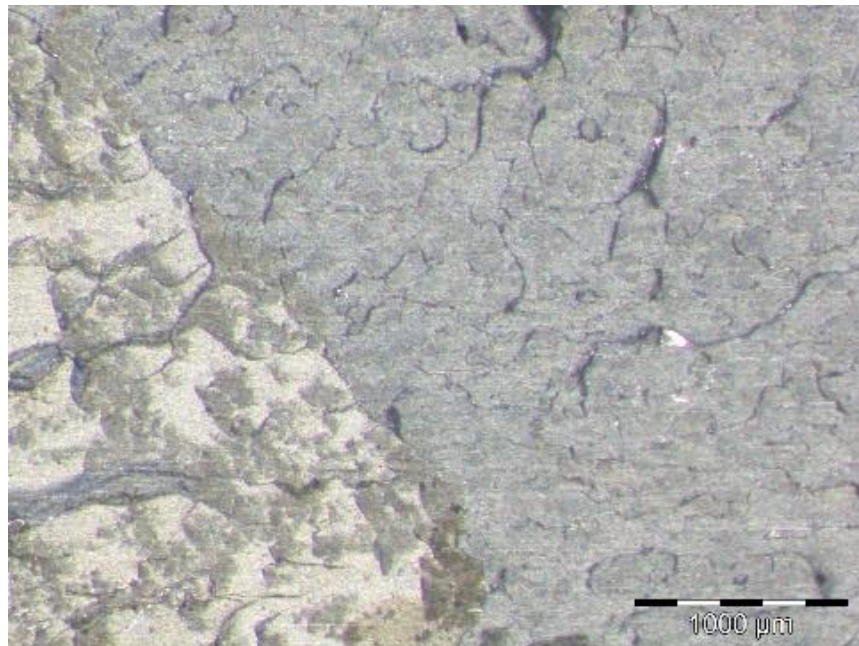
Stereo microscope image of crack surface after fracture testing for test temperature 225°C.
